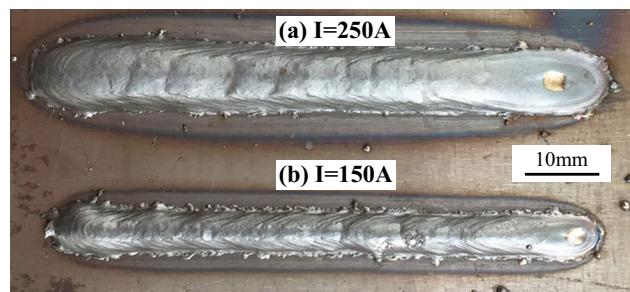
Weld beads with the current at 150 and 250 A
